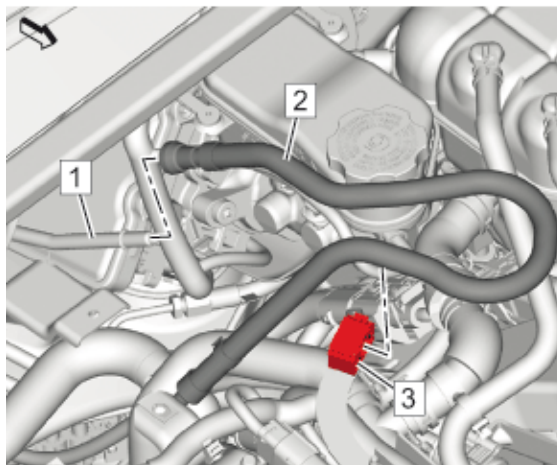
Fuel Feed Pipe, Fuel Feed Front Pipe And Retainer
